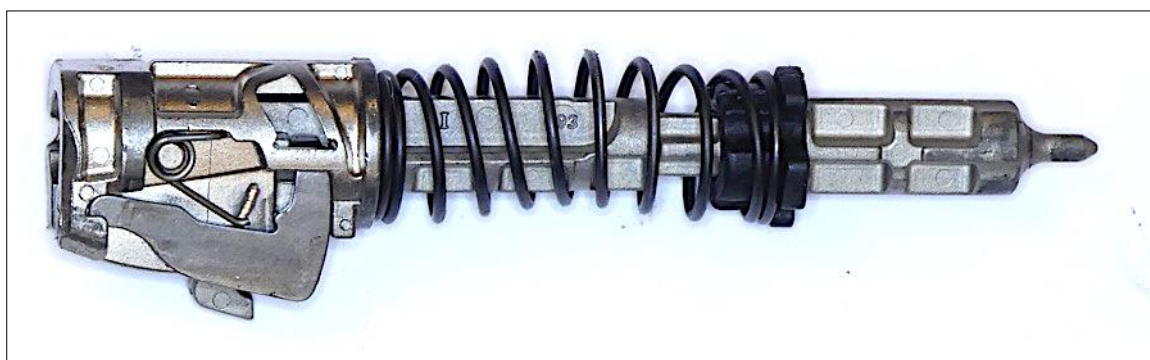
The Subject Striker Assembly in the Full Blocked Condition
